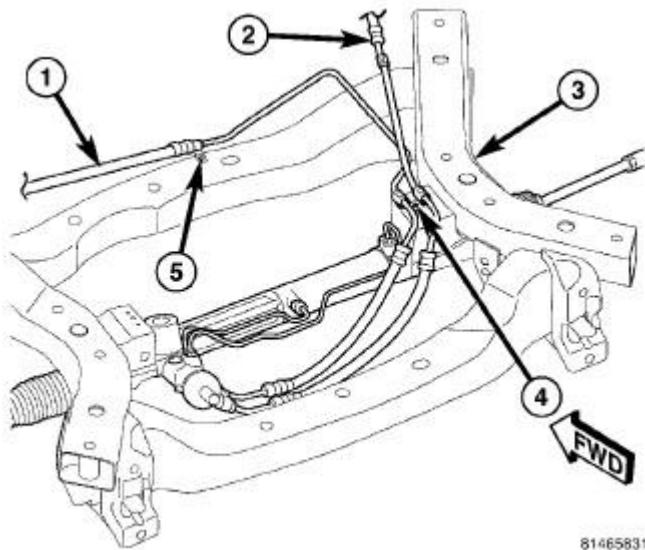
HOSE ROUTING ALONG ENGINE CRADLE
